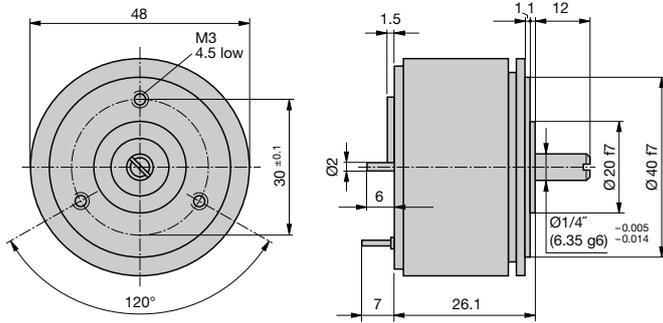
KINAX 2W2 with special drive shaft at front and rear.
